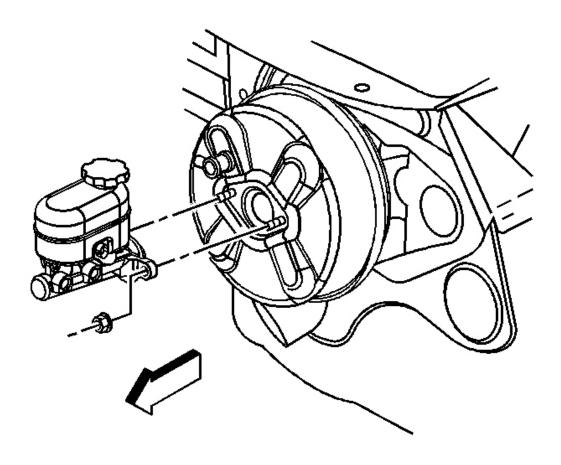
Master Cylinder To Booster View Courtesy of GENERAL MOTORS CORP.
